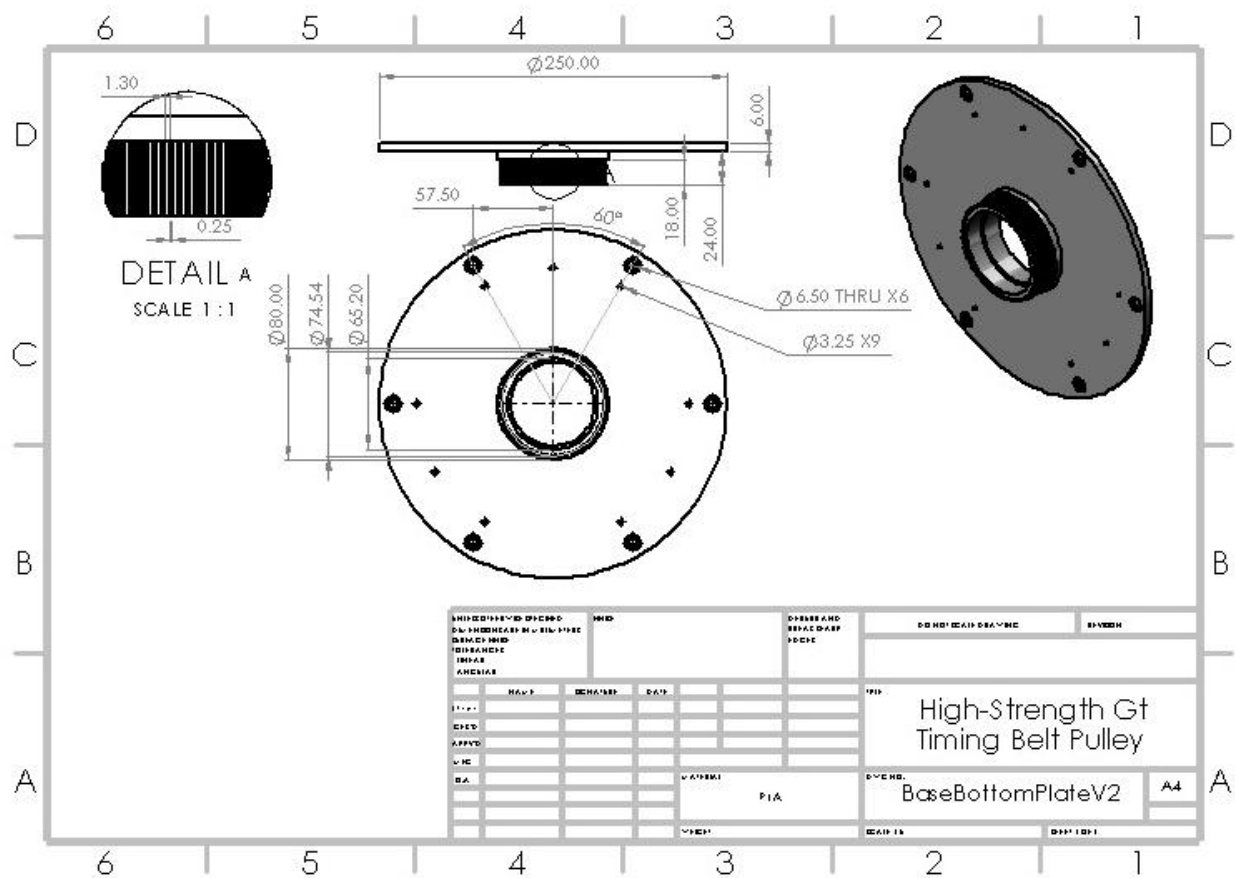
Base Bottom Plate with Belt Pulley engineering drawing
